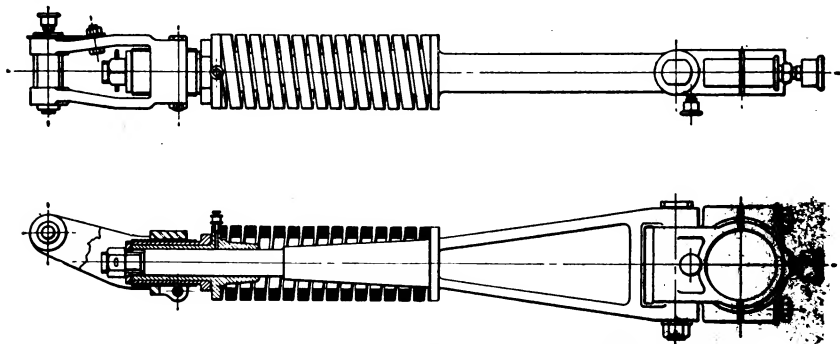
Flexible Universally Jointed Radius Rod for Double Side-Chain Drive
